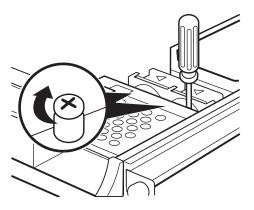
Tightening the SAS IF Assembly Screws
